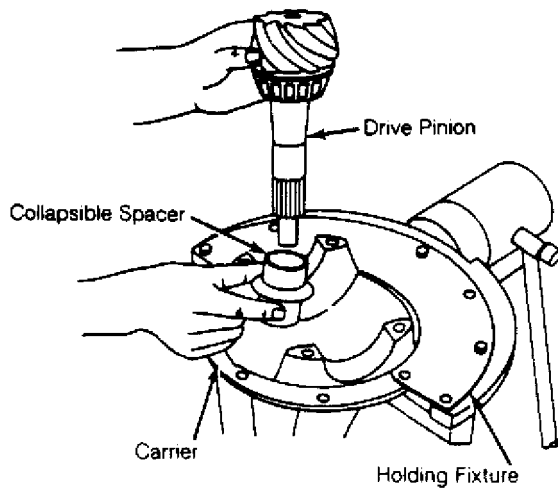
Installing Drive Pinion Bearing Collapsible Spacer
